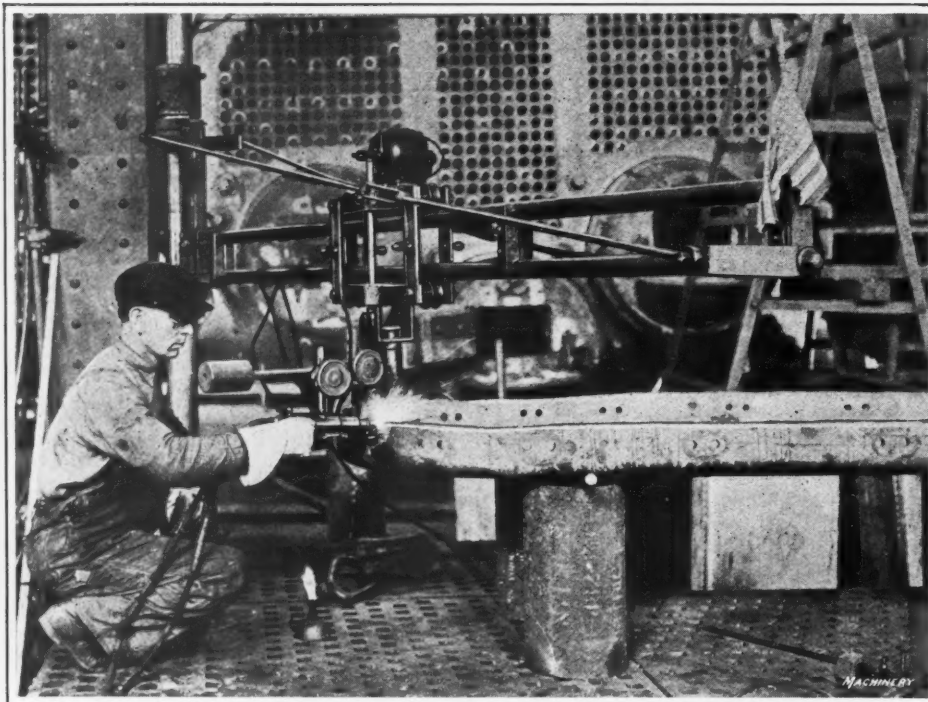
Practice of New York Shipbuilding Corporation in cutting off Ragged Edge of a Boiler Head or Similar Shaped Piece which has a Flange turned up around its Circumference
